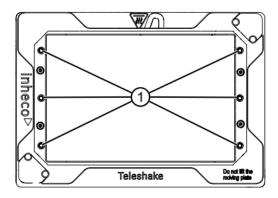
Threaded holes to fix or unfix the adapter plates (1: M2.5 x10)
